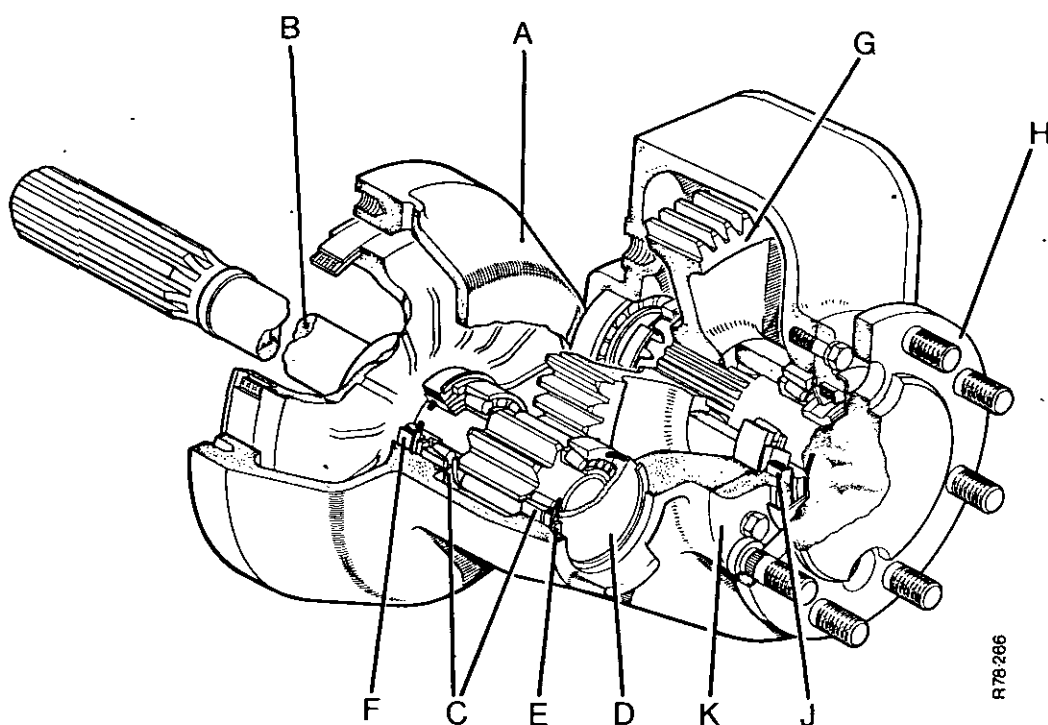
FINAL DRIVE UNIT: 1210 TRACTOR
